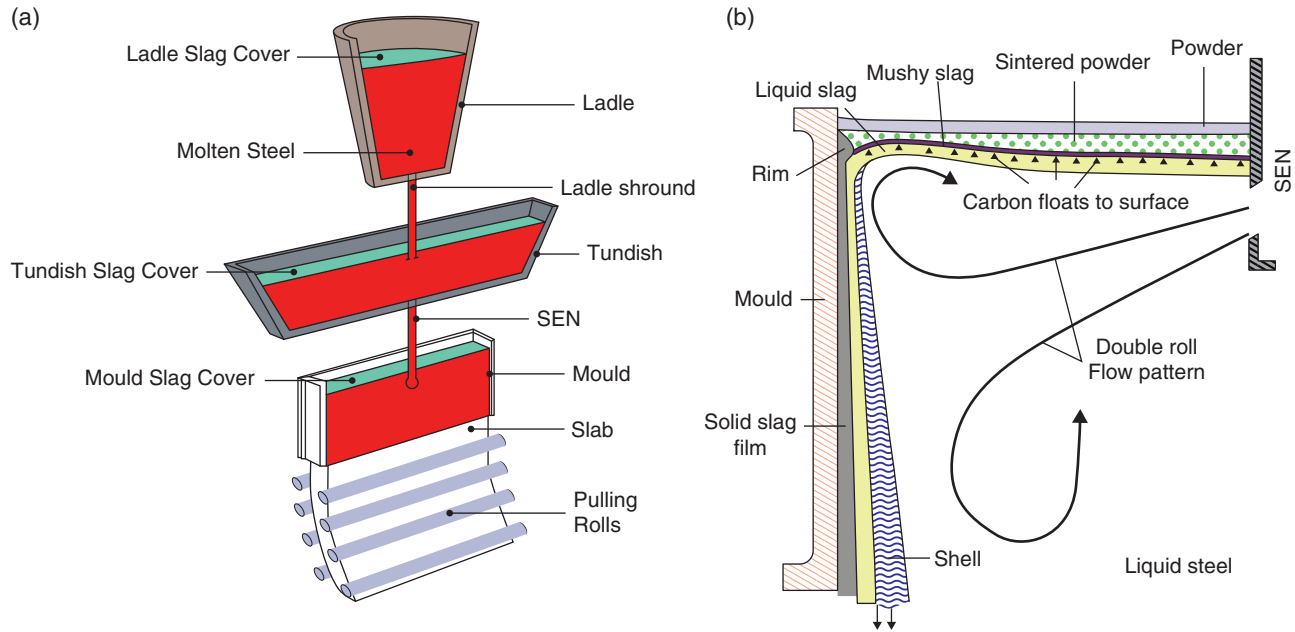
Sketch of the continuous casting process. (a) Ladle, tundish, and mold and secondary cooling. (b) Half-section of the mold showing mold powder added to the top forming a liquid slag pool, which, in turn, forms solid and liquid slag layers by infiltrating between the steel shell and water-cooled copper mold.
